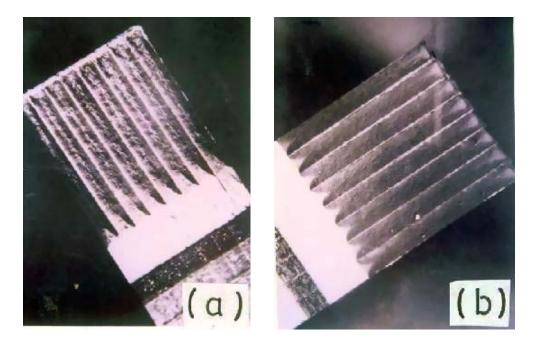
General view of fracture surface typical of (a) patented and cold worked laminates and (b) hardened and tempered laminates where each elements fails by slant fracture at approximately 45° to the tension axis.
